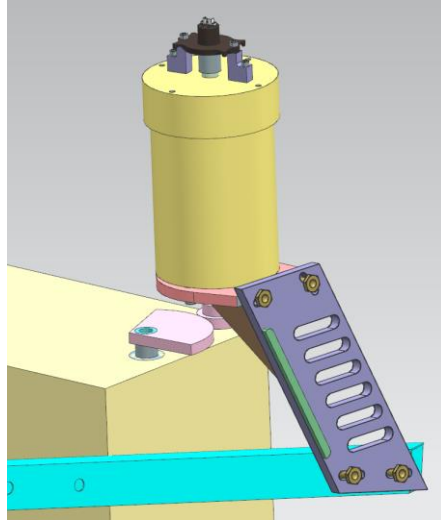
The CAD model of the motor mount system with the encoder at the top of the motor and the gears below the motor. The mount can also be seen with its two bolt slots.
